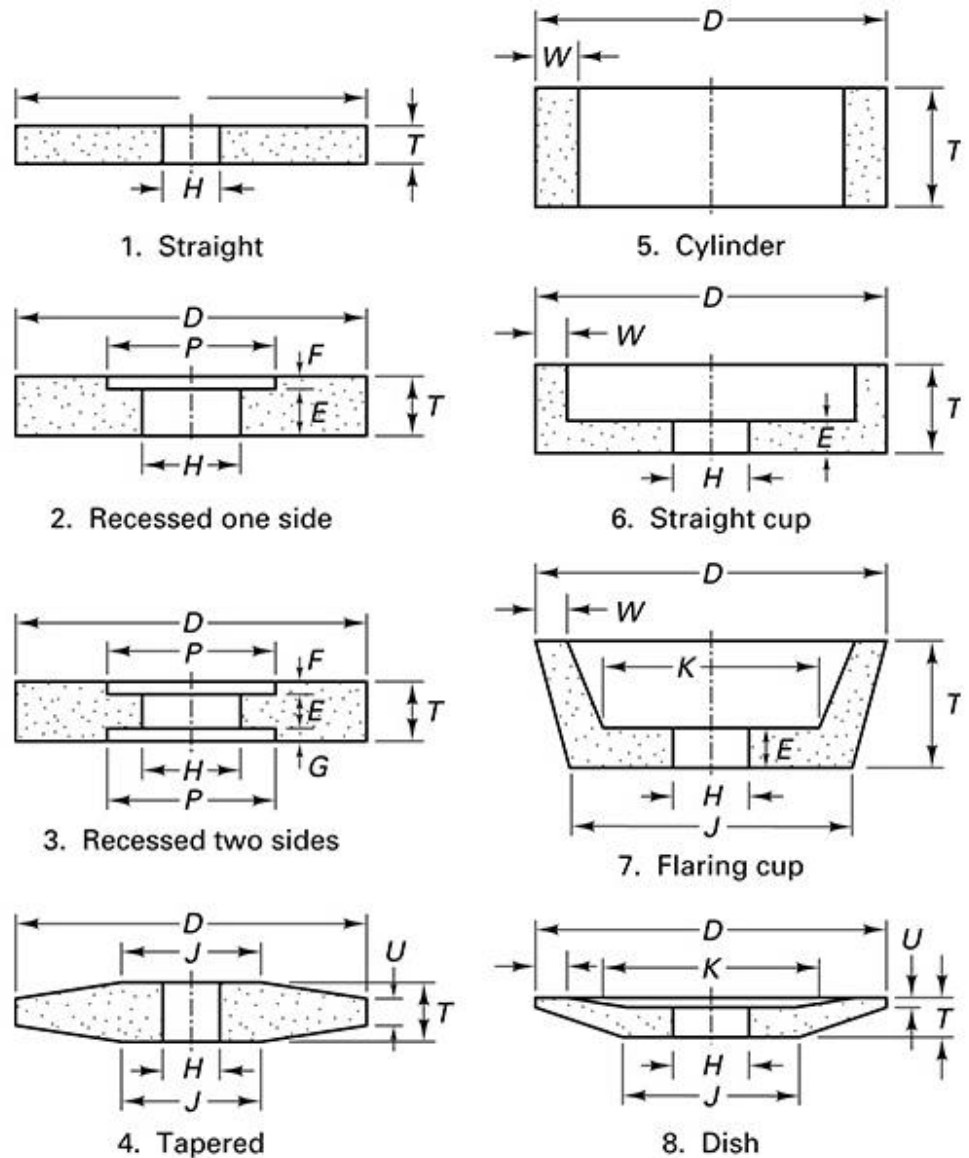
Standard grinding wheel shapes commonly used. (Courtesy of Carborundum Company.)
